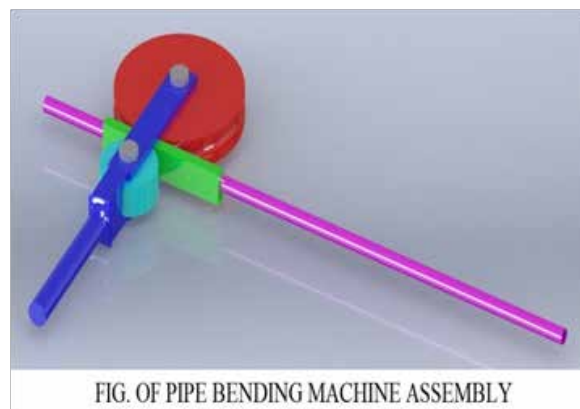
FIG. OF PIPE BENDING MACHINE ASSEMBLY
